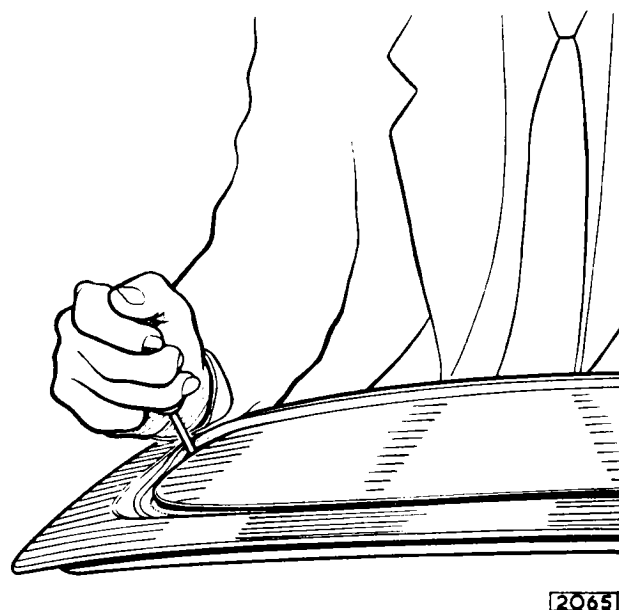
Removal of the rear glass (Fixed Head Coupe)
